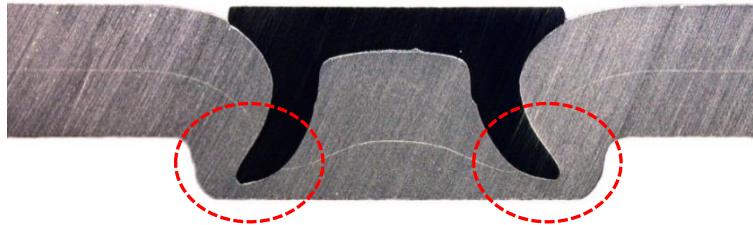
, Example of a cross section of SPR joint showing the rivet does not pierce through the bottom sheet (SPR ES, 2018).
